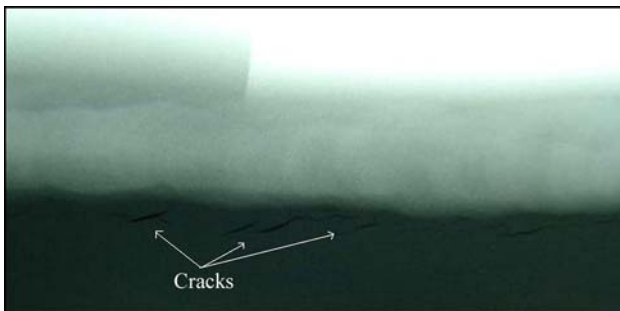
Radiograph of welded part showing cracks adjacent to the weld bead
